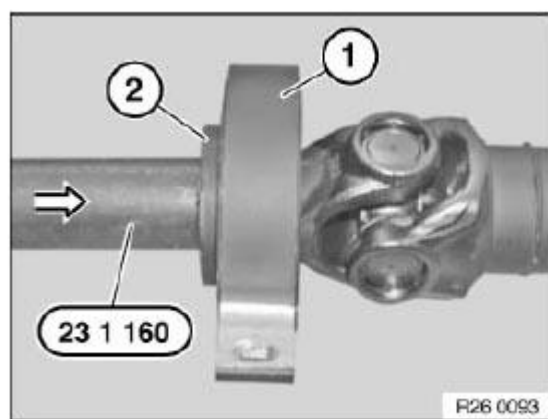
Identifying Special Tool (23 1 160) On Center Mount
